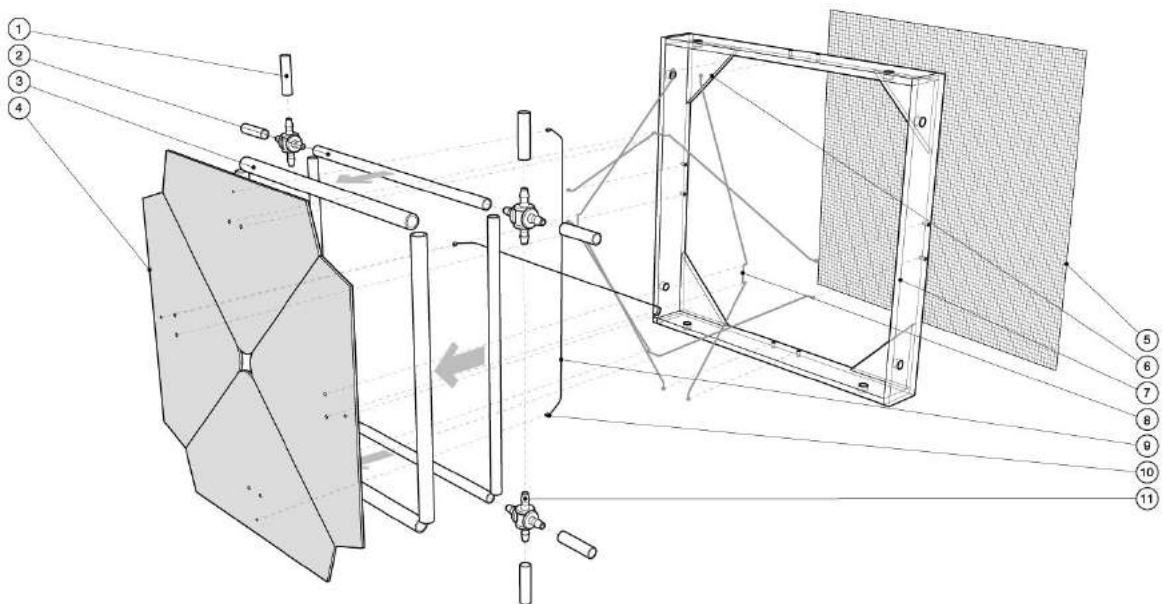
Exploded axonometry of the prototype’s assembly; 8 are the elastic cords and 9 is the SMA wire ( ‘Air Flower’ n.d.).
